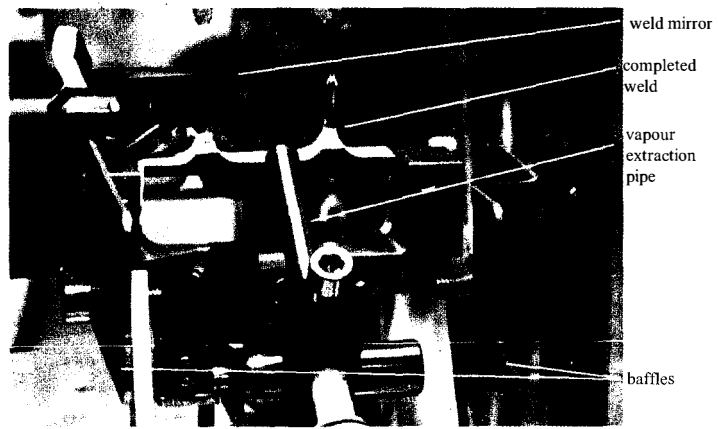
This picture shows two attachment points where the fibres are welded to the mass, the one on the right already has a finished weld. Weld tooling is in place on the one on the left. The long thin steel pipe is the extraction pipe to remove any silica vapour and stop deposition on the fibres or test mass during welding. The angled mirror that allows full access to the weld can be seen, as can the baffles used to catch errant beams.
